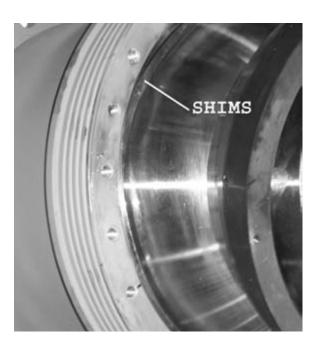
Remove the Retainer (wear sleeve), Install Packing Shim Pack
